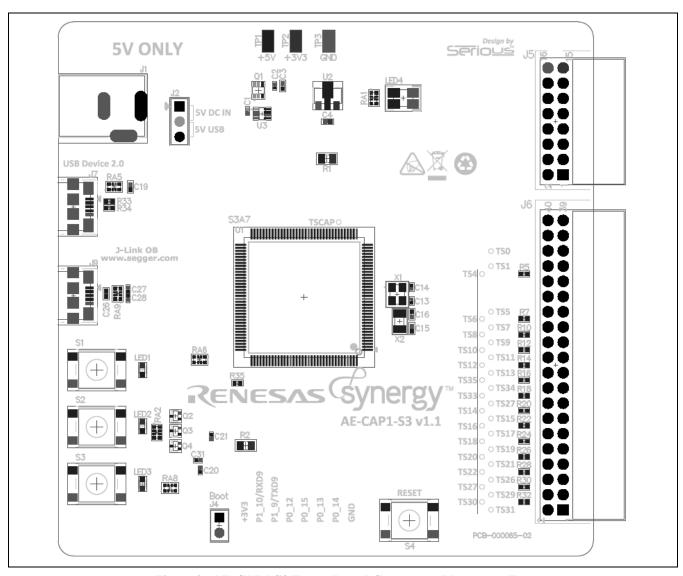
AE-CAP1-S3 Target Board Component Placement, Top
